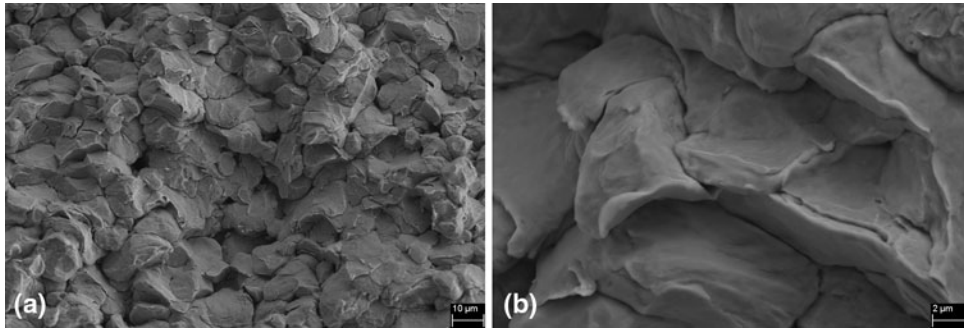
Fracture surfaces of D\_Cu coating (a) general and (b) detailed view. FESEM images
